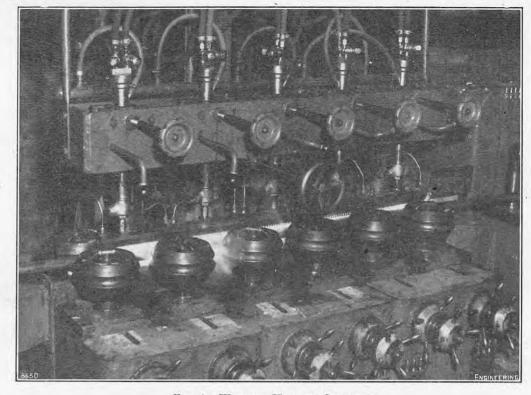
WELDING HEAD IN OPERATION.
